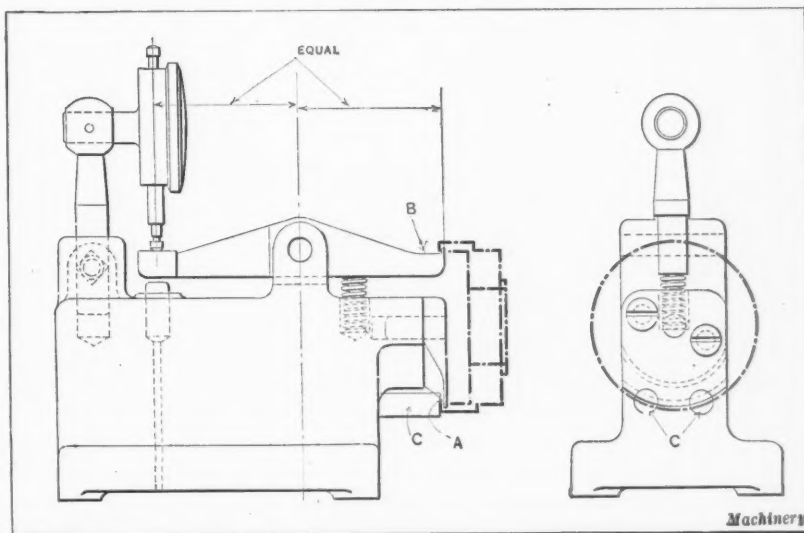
Position of the Work when inspected with the Gaging Fixture shown in Fig. 11
